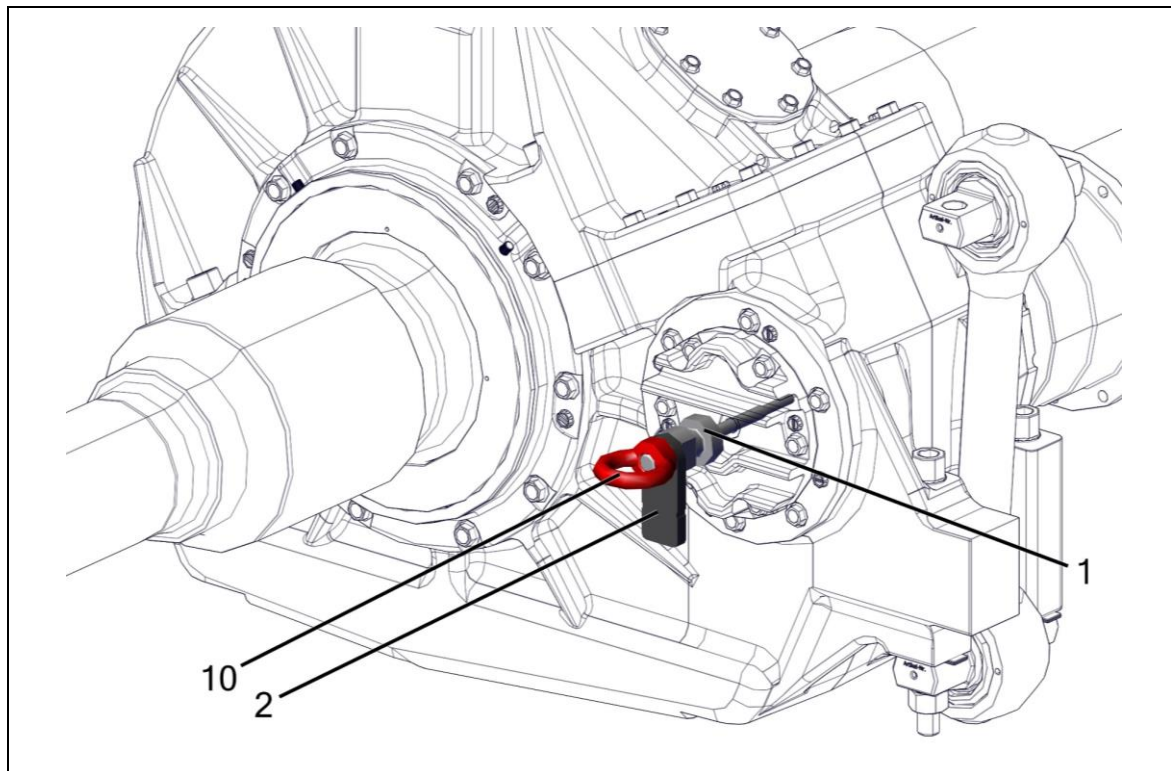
Adapter – measuring flank clearance - AAV003020R0001 – T3
